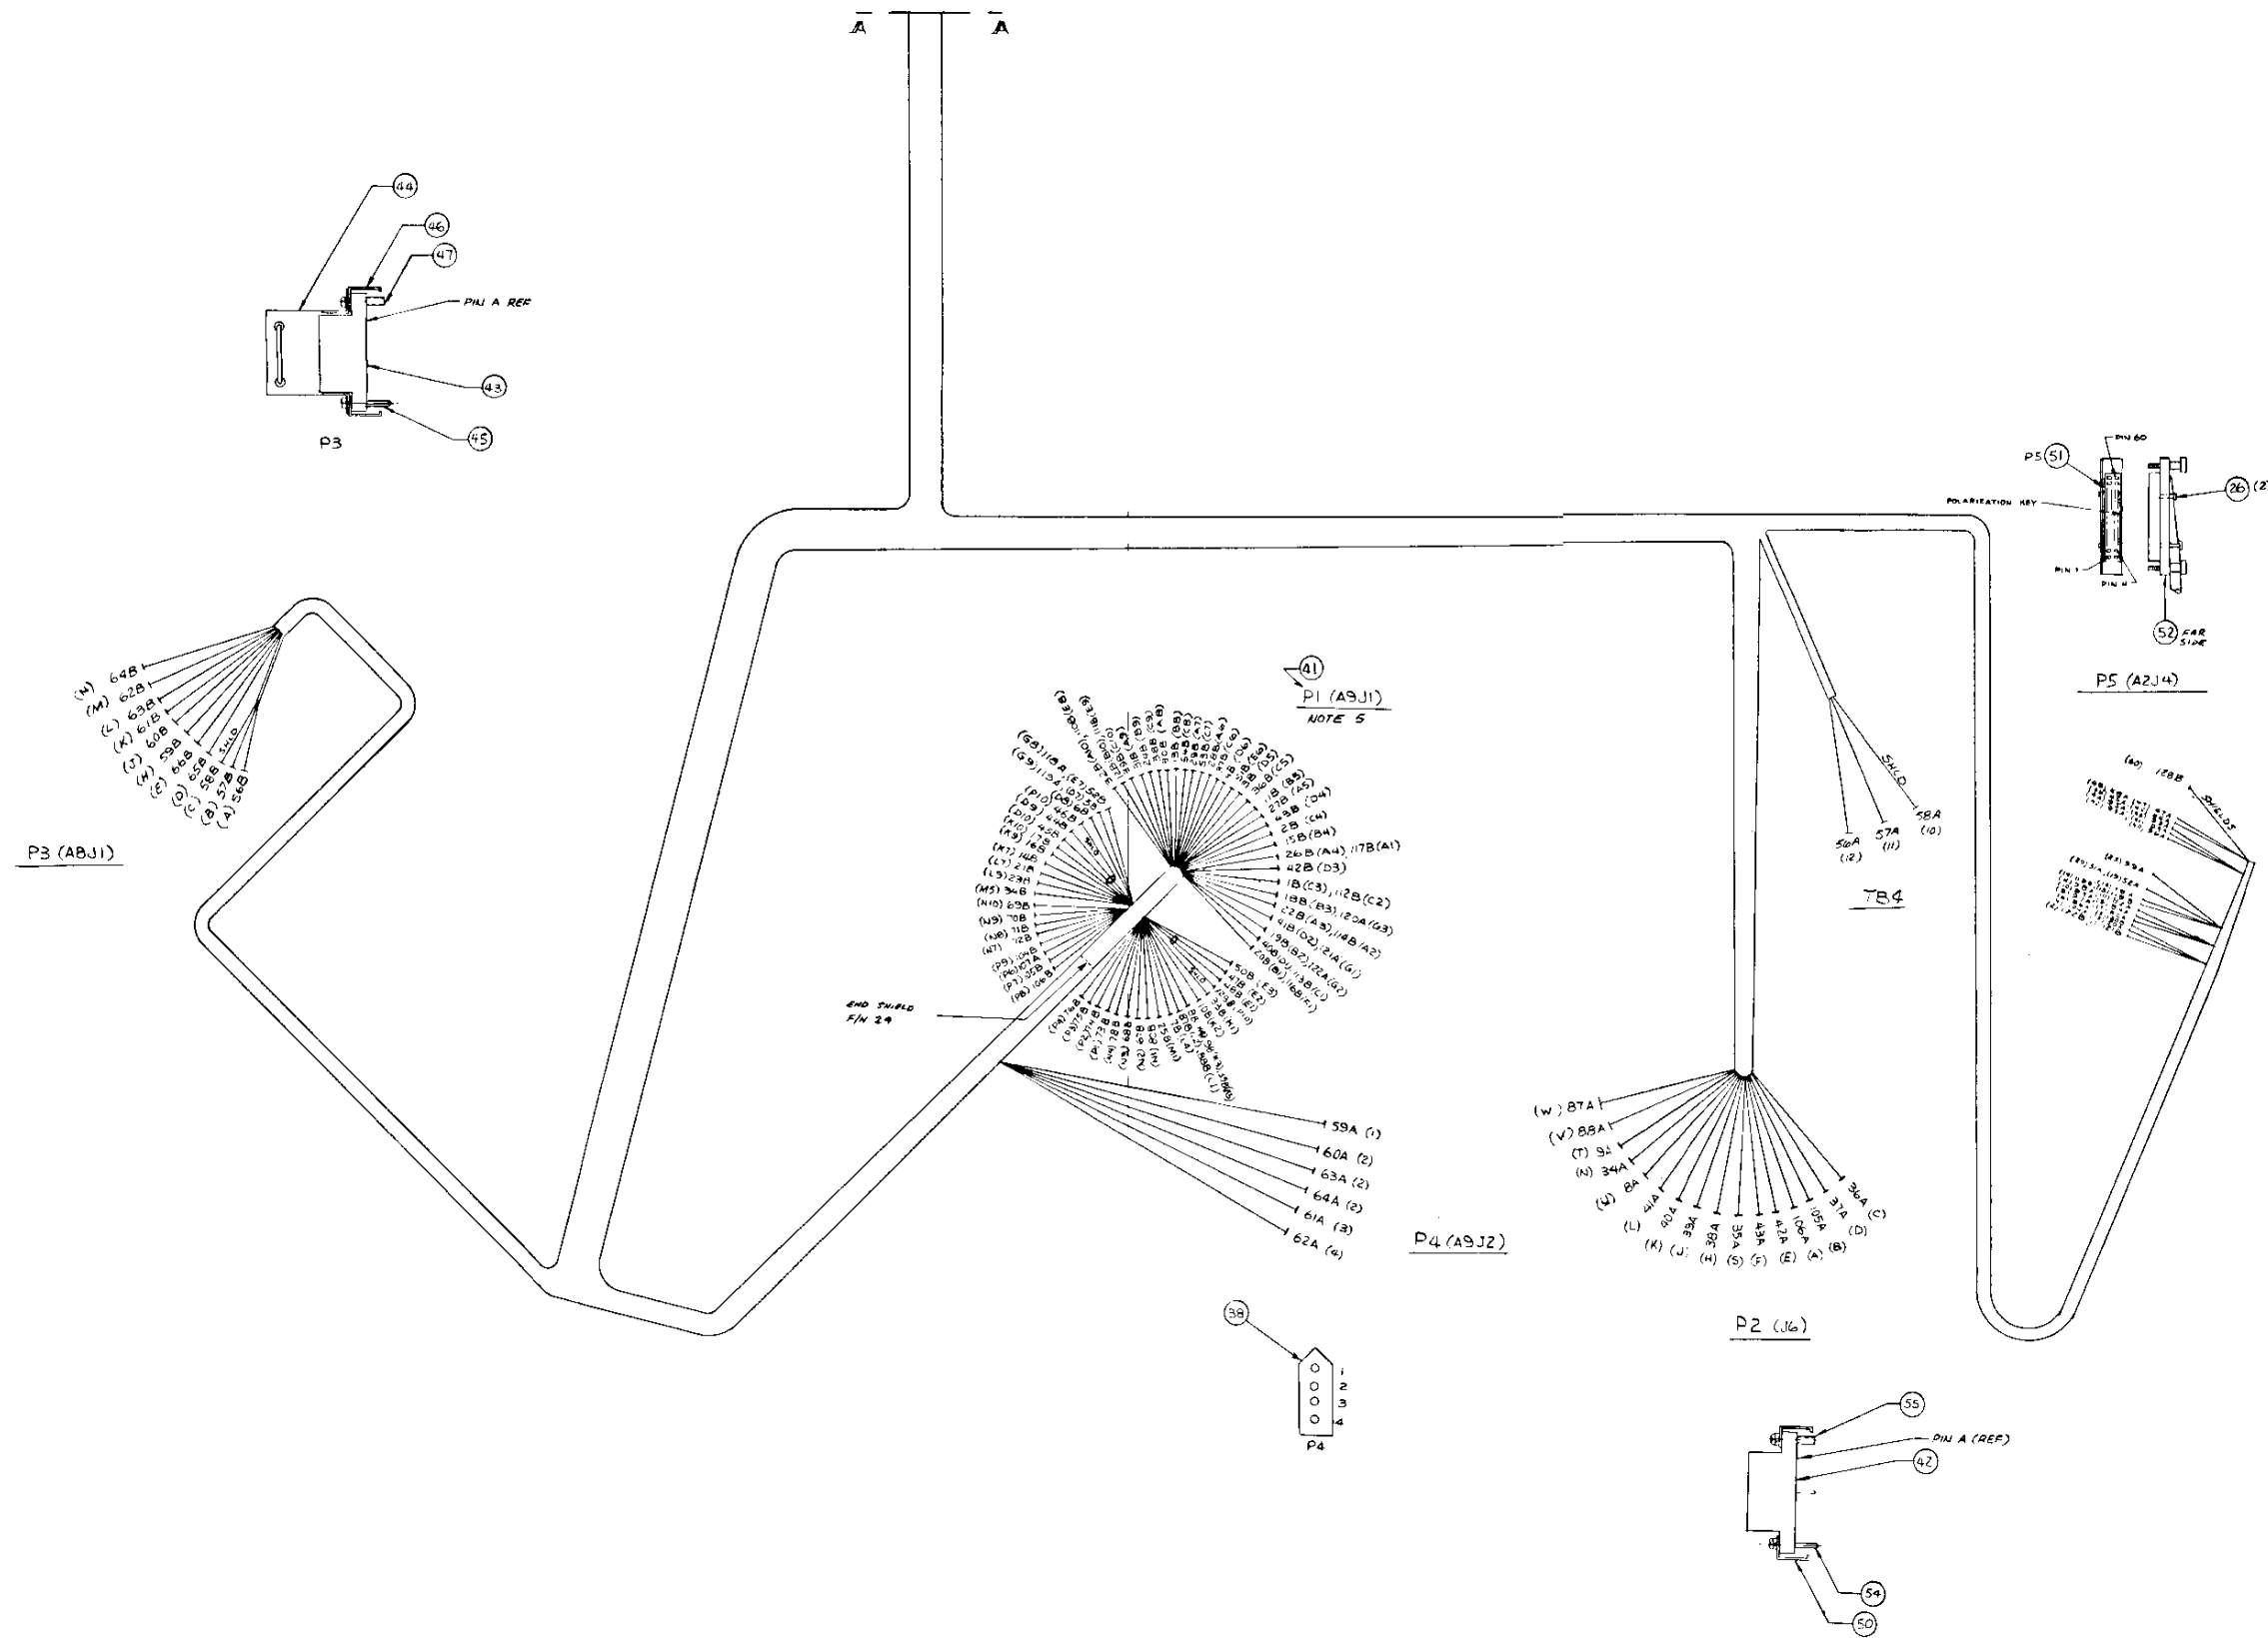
Headset Main Harness Assembly Drawing (Sheet 1 of 2)
